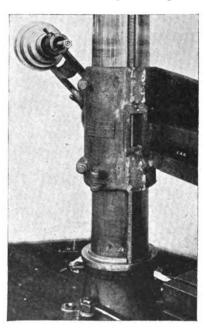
Radial Drill Housing Welded with Graphite Electrode Courtesy of C. & C. Electric and Manufacturing Company
